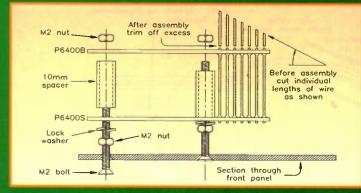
The exploded assembly including the fitting and cutting of the seven interconnecting wires.
